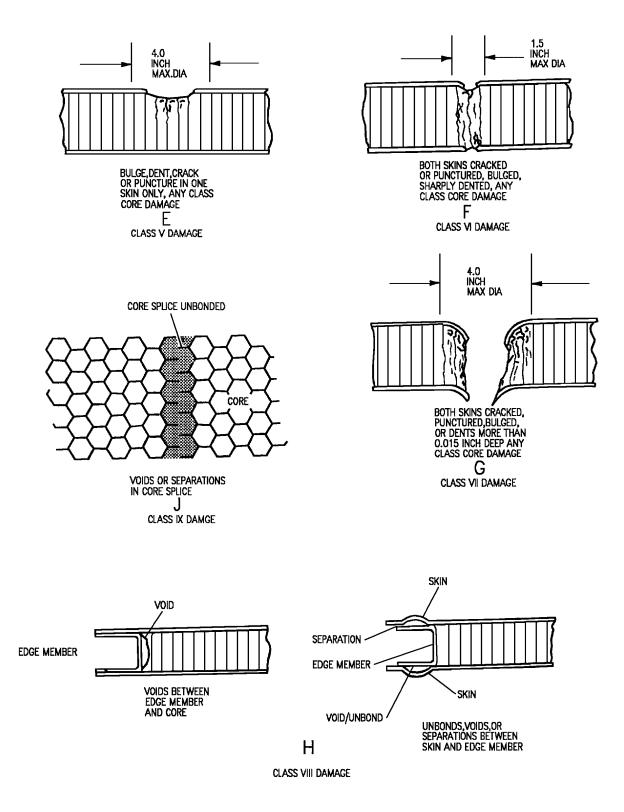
Repairable Damage, Aluminum Skin and Aluminum Honeycomb Core (Sheet 2)
